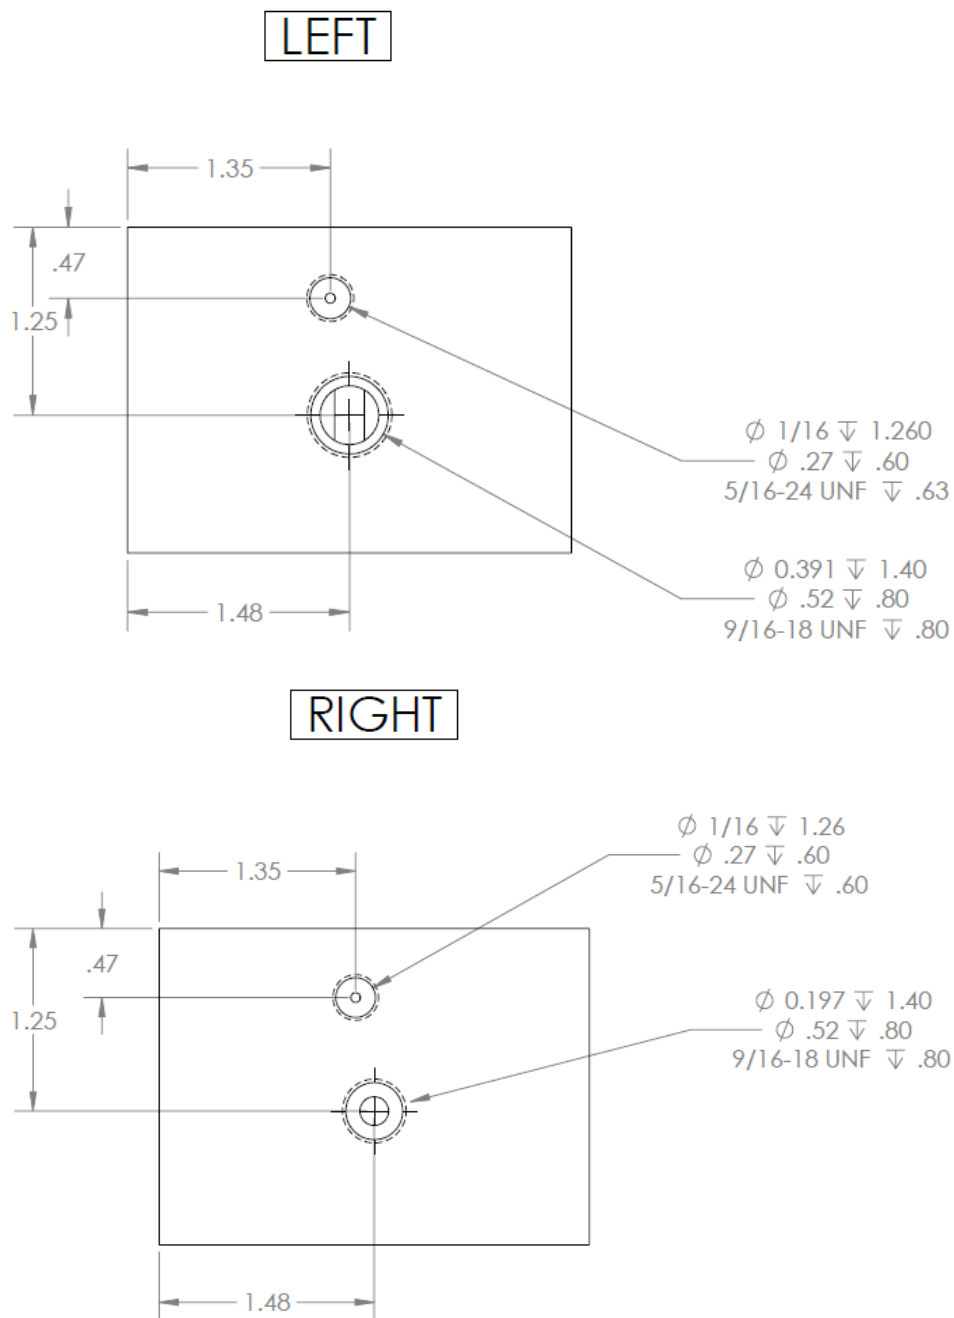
Technical drawings of the manifold base for the 9 × 9 test vehicle; all dimensions in inches unless otherwise specified.
